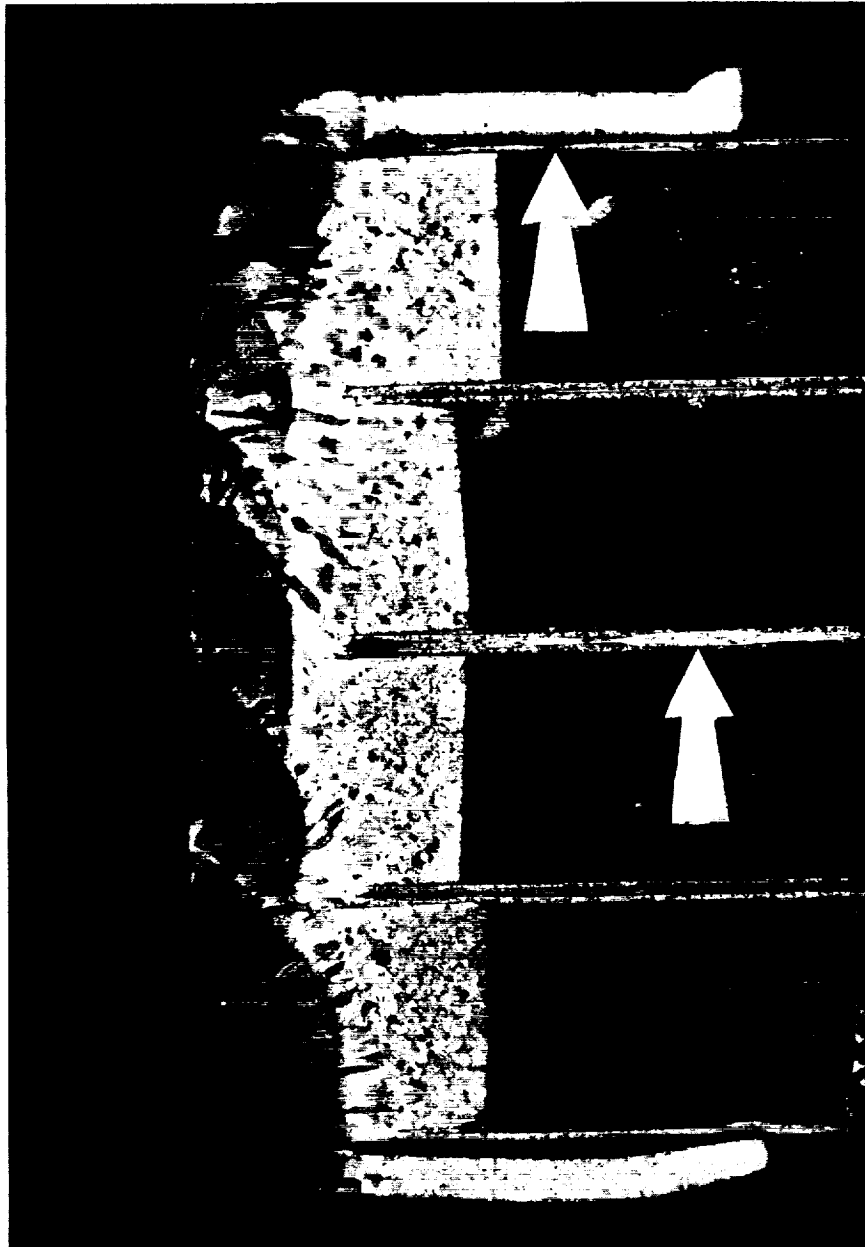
Section (8X) Through First Layer of Sample Joint #F4, Brazed with Gold-Copper (80-20) Alloy with Nickel Plugs TIG Welded to Ends of Conductors, Showing Sheath Erosion at Arrows.
